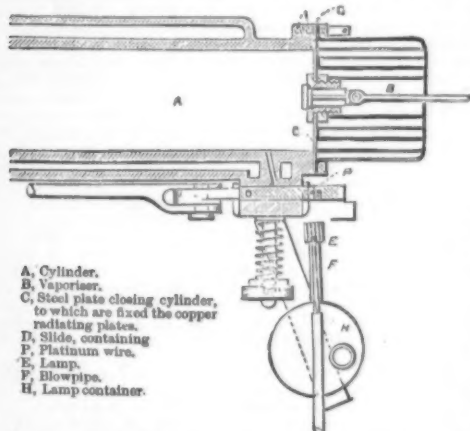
KNIGHT'S PETROLEUM ENGINE.
